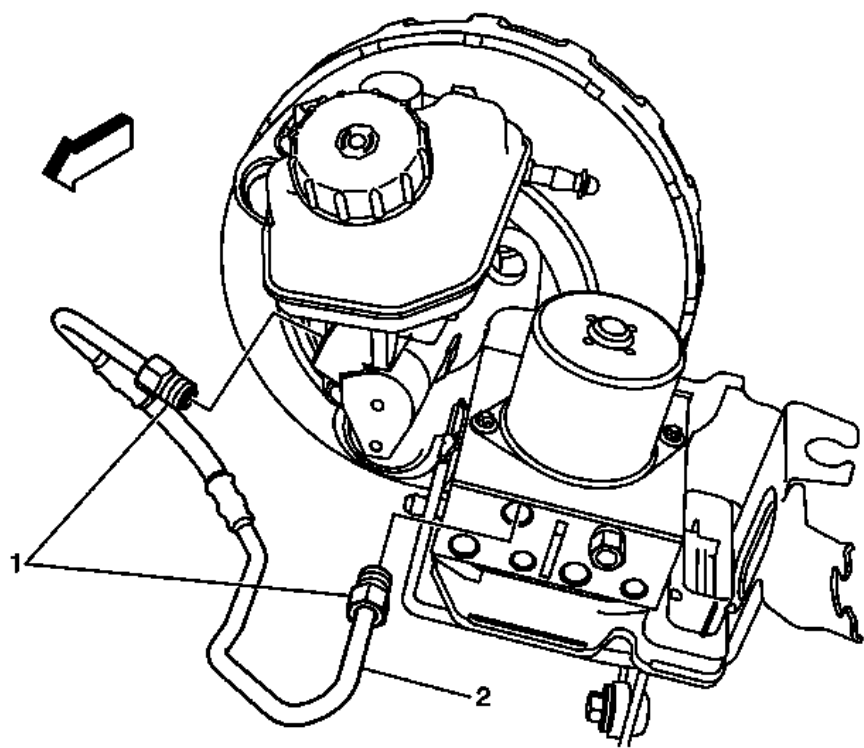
Brake Pressure Modulator Valve Secondary Pipe (Left Hand Drive)
